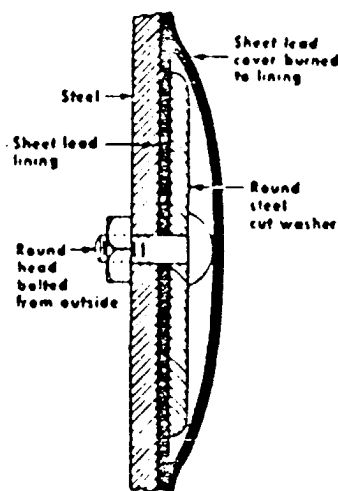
Button-type fastening of sheet lead lining to steel structure.
